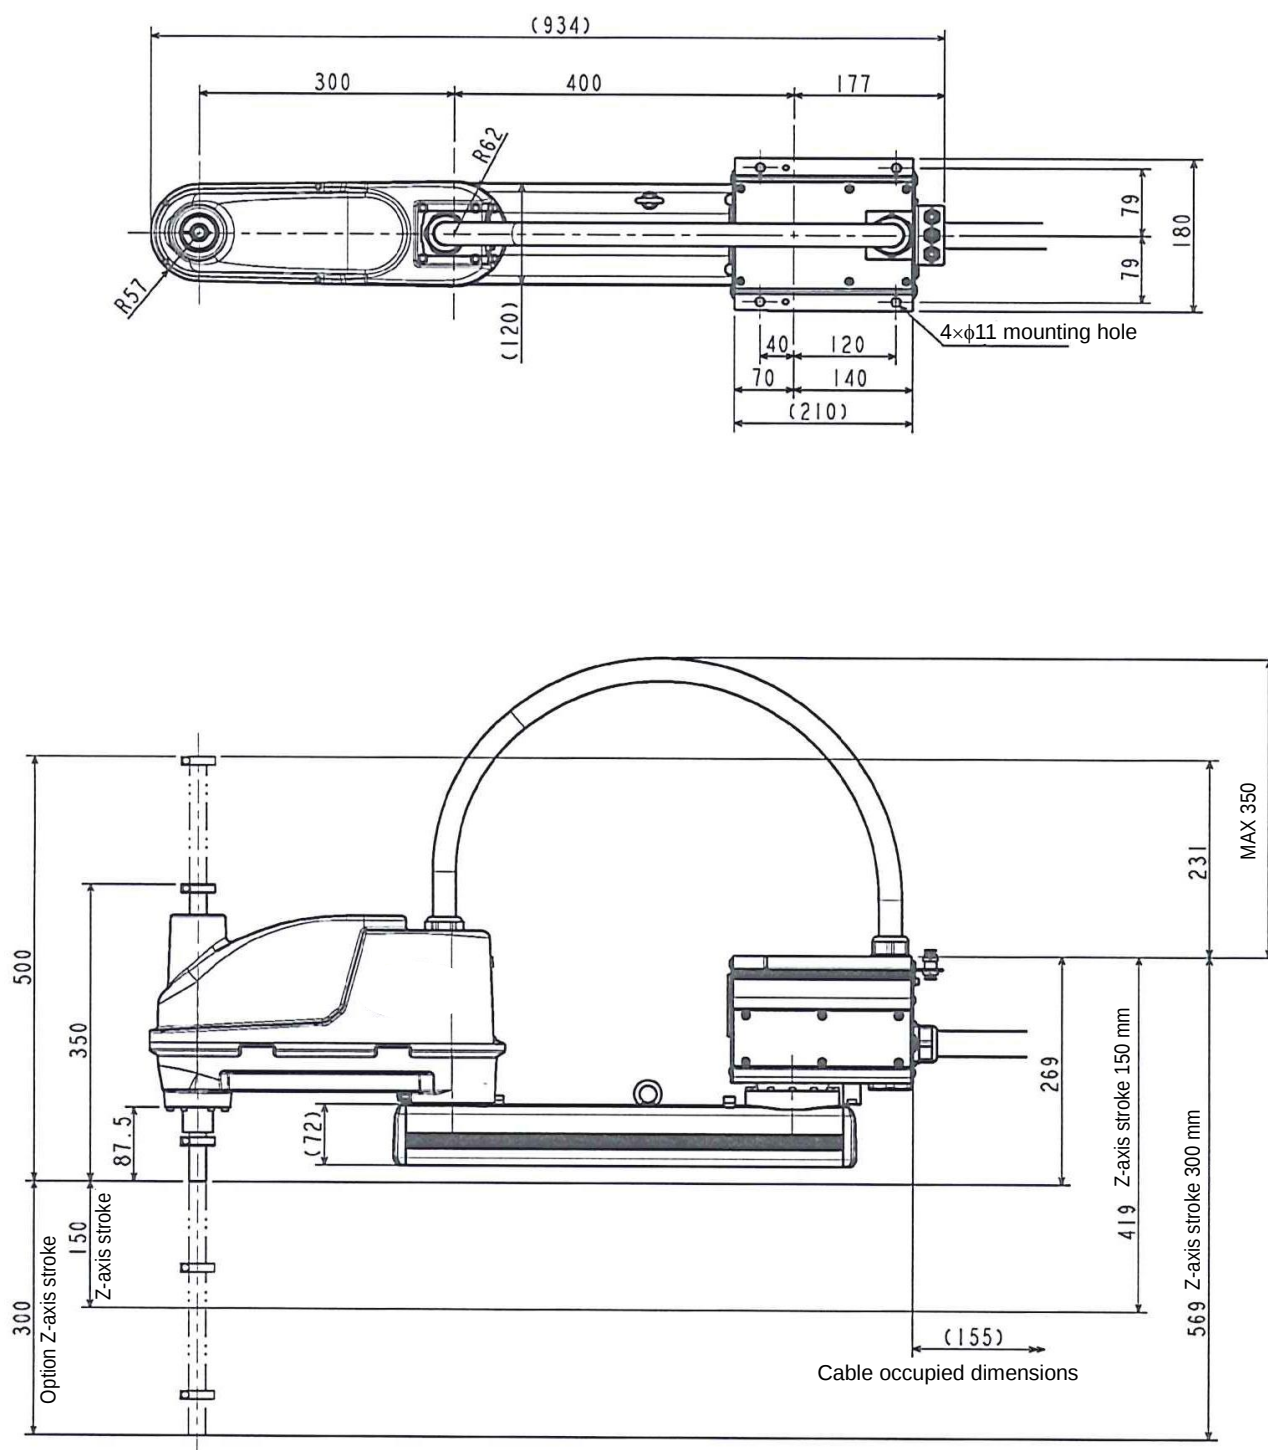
Outer dimensions of the robot (KHL-700-T)
